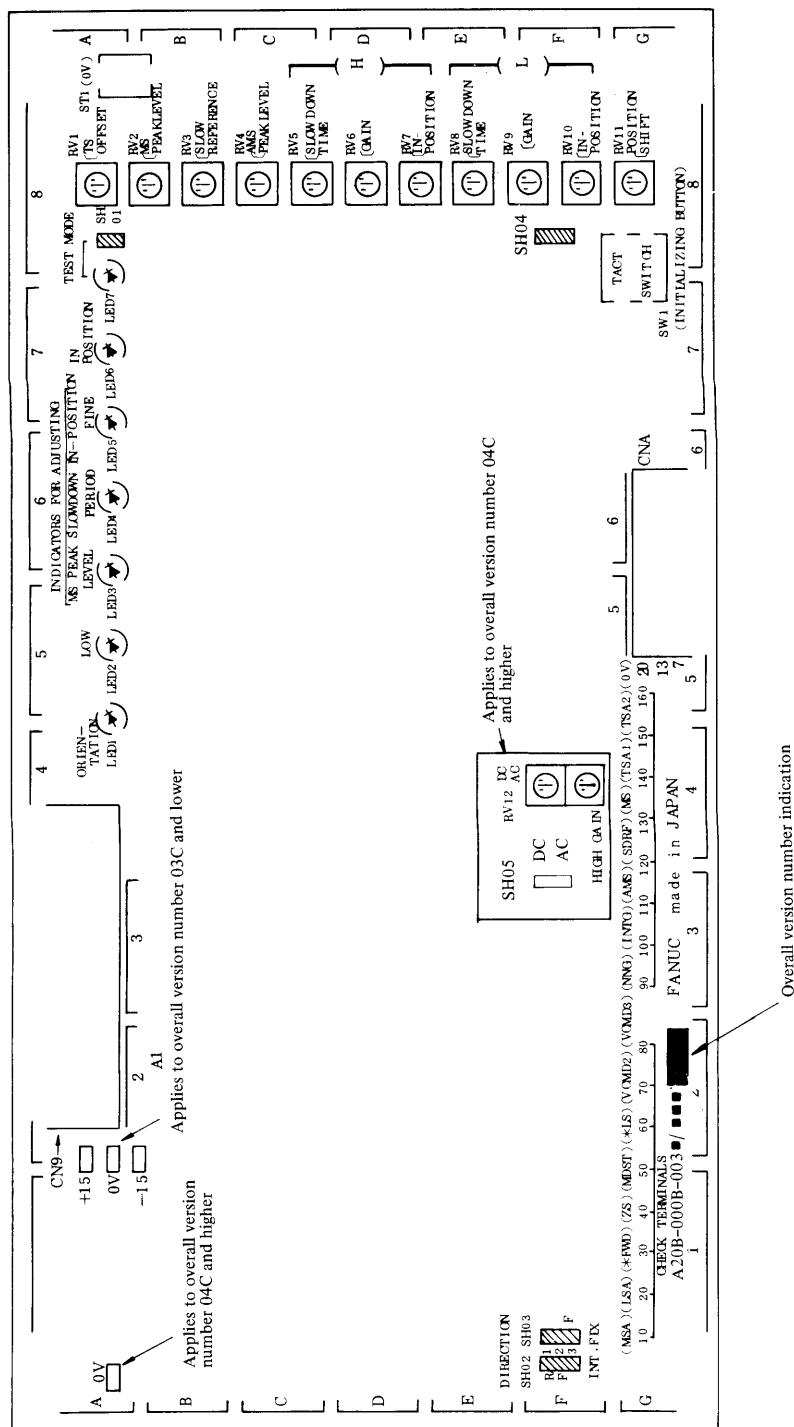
Mounting positions of check terminals, variable resistors, setting pins and light-emitting diodes (LED) (PCB A20B-0008-0030)
